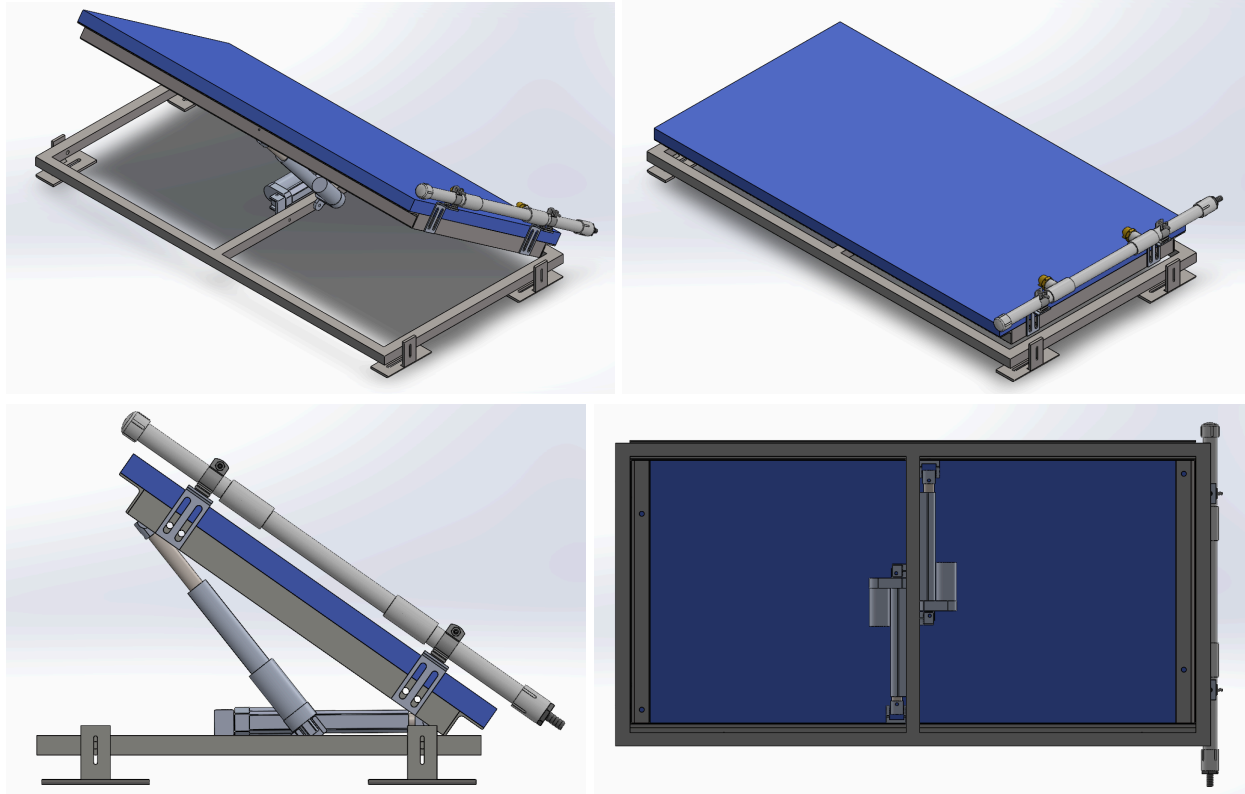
The finalized CAD of the system, in rotated up (top left) and folded down (top right) configurations, rotated up side view (bottom left), and bottom view (bottom right).
